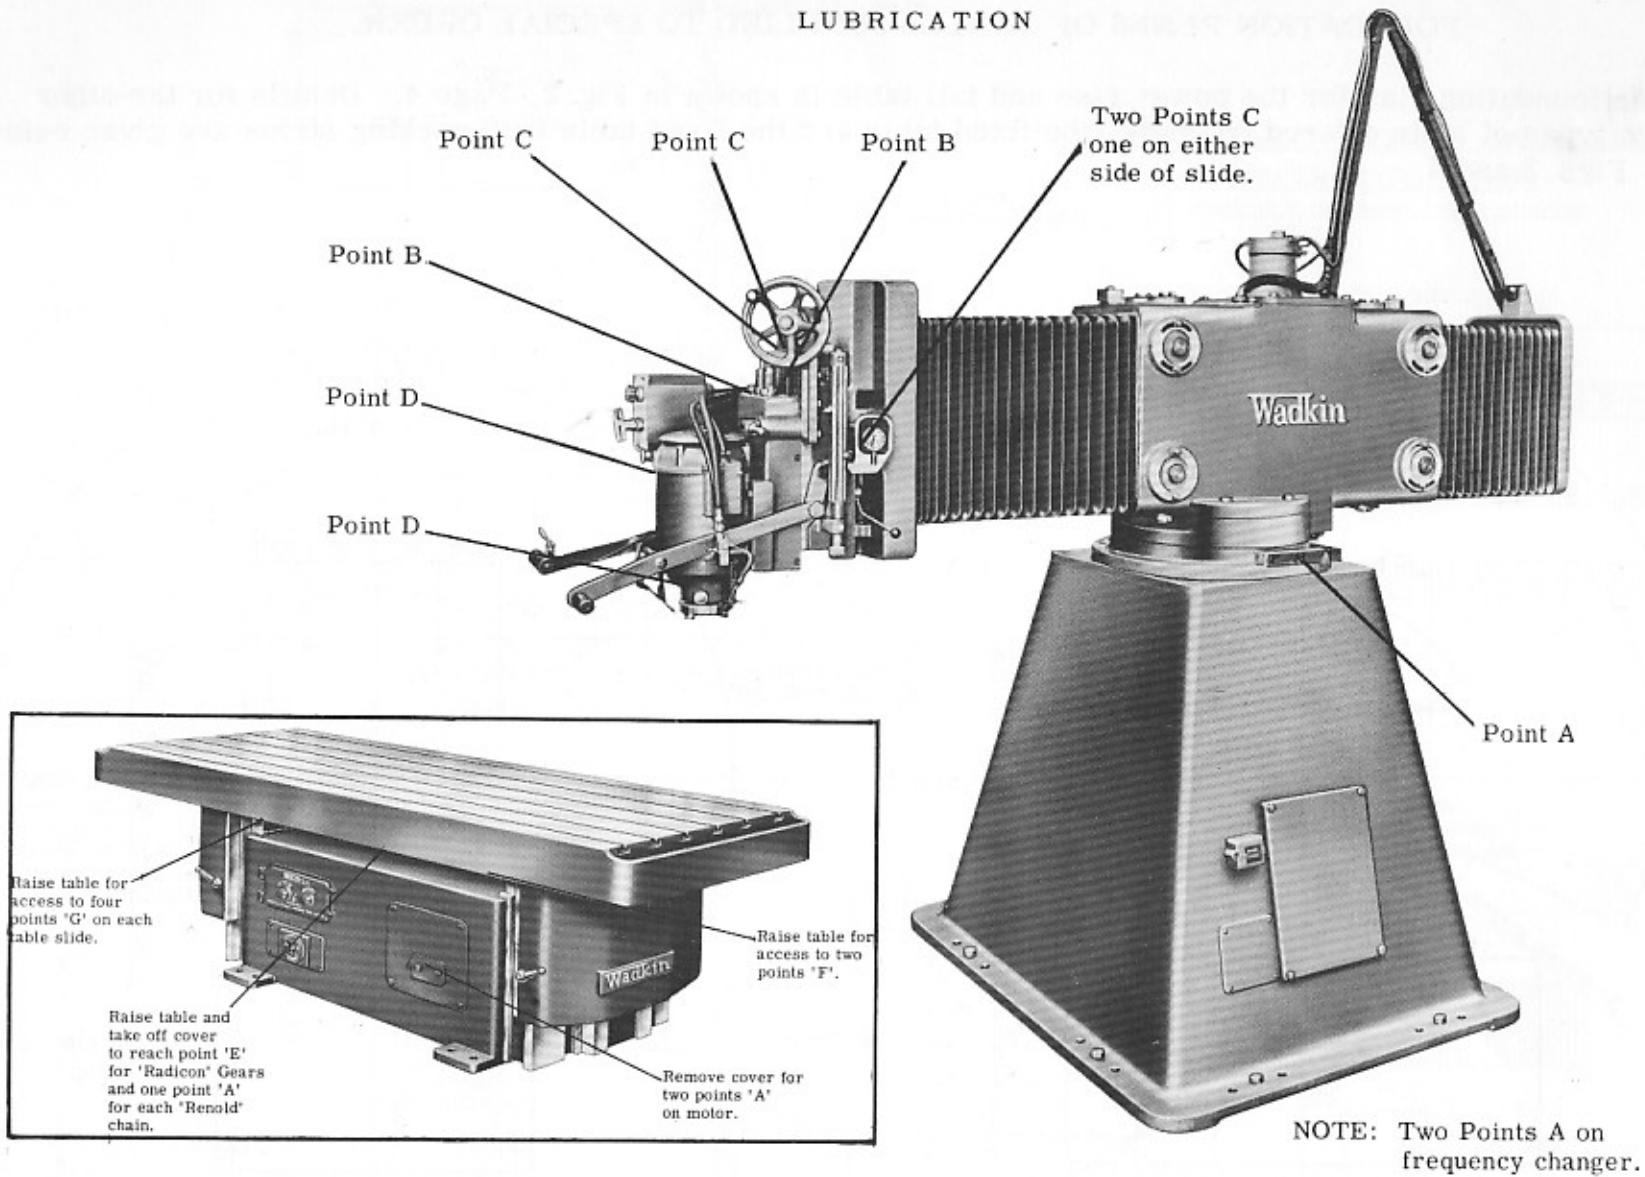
GENERAL VIEW OF MACHINE AND POWER RISE AND FALL TABLE SHOWING LUBRICATION POINTS.
